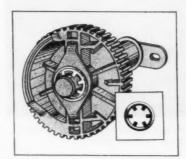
Waldes Truarc self-locking retaining ring used on nylon windshield wiper gear
